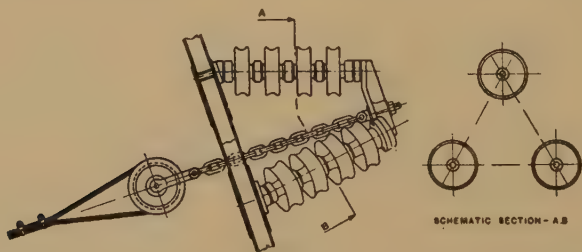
Pedestal type insulator assembly for a long span, showing the use of a sheave for anchoring the conductor.
